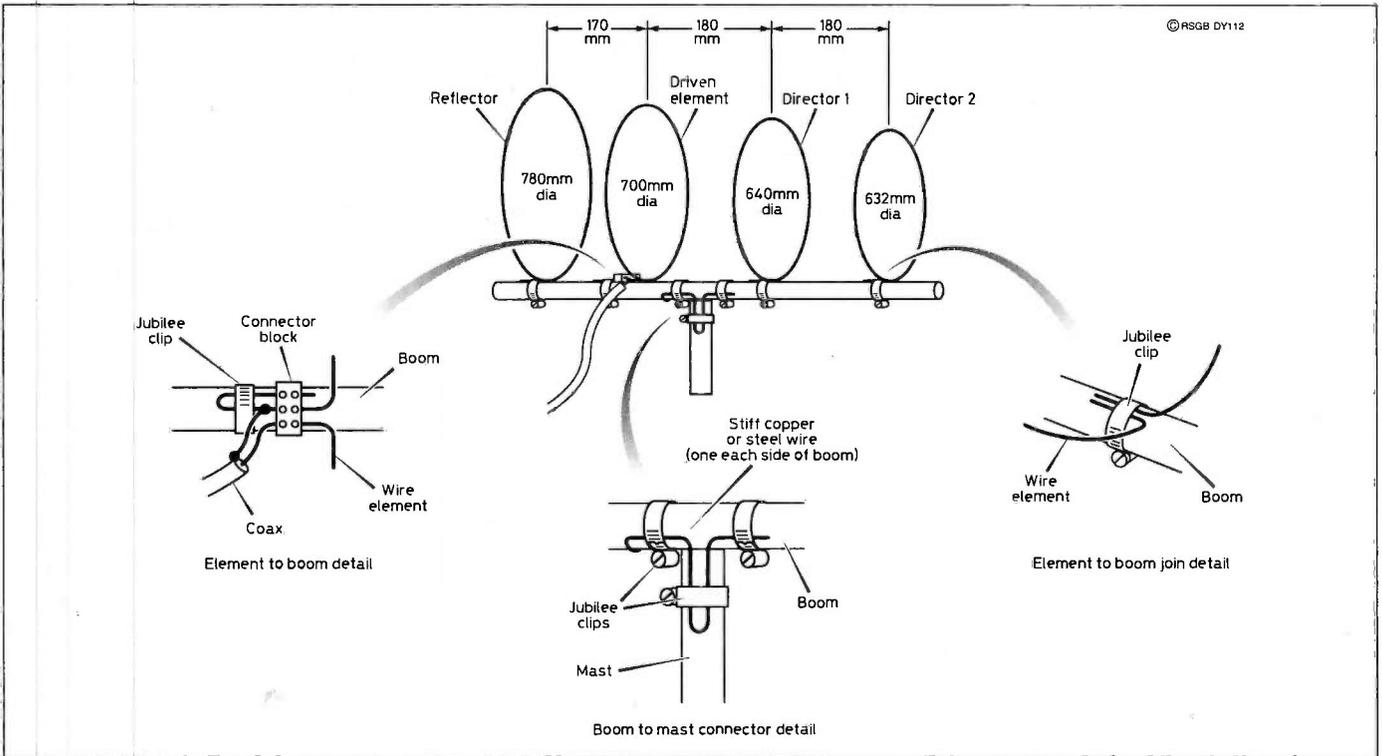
70cm 4 element quad construction, with detail of how hose clamps are used in the construction.
